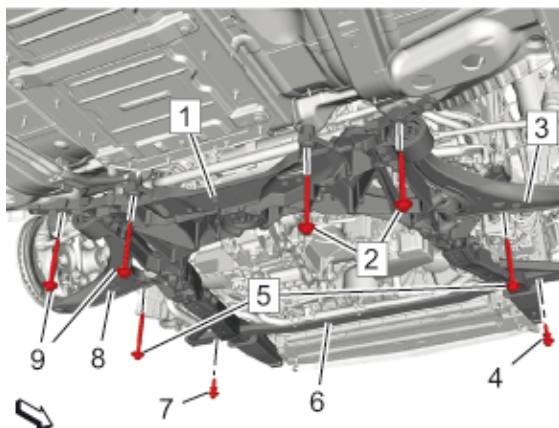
Drivetrain And Front Suspension Cradle, Crossmember Extension And Bolts
